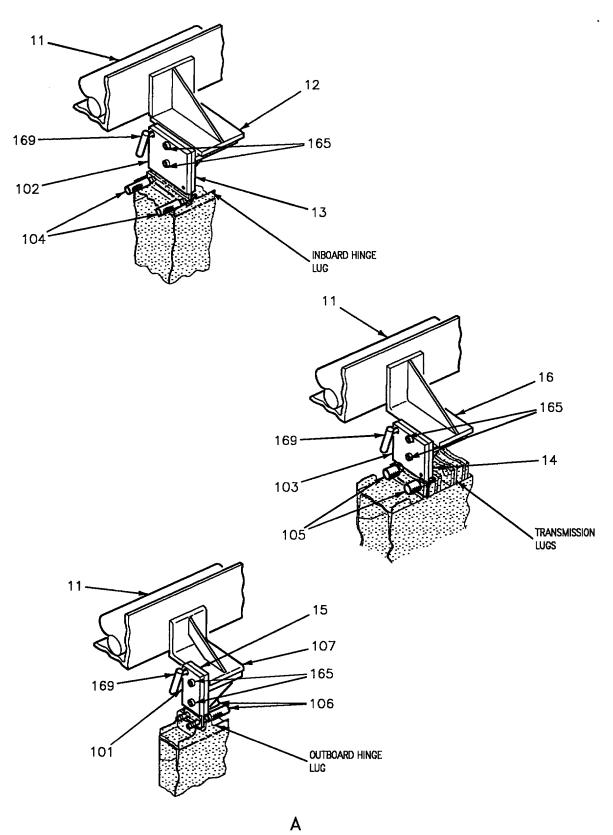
Alignment and Drilling for Rigging Rivet (Sheet 2)
